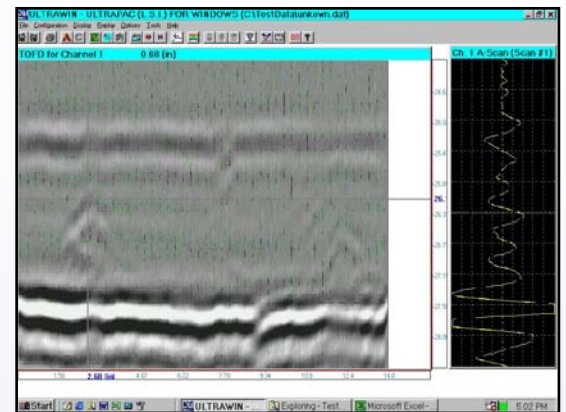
Weld inspection TOFD Scan analysis screen
